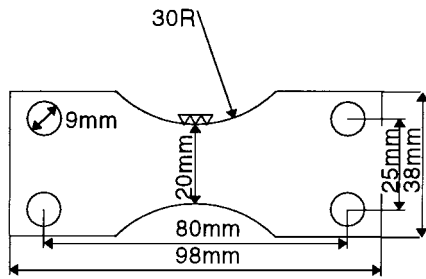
Dimension of the specimen for stress controlled fatigue test (plane bending test).
